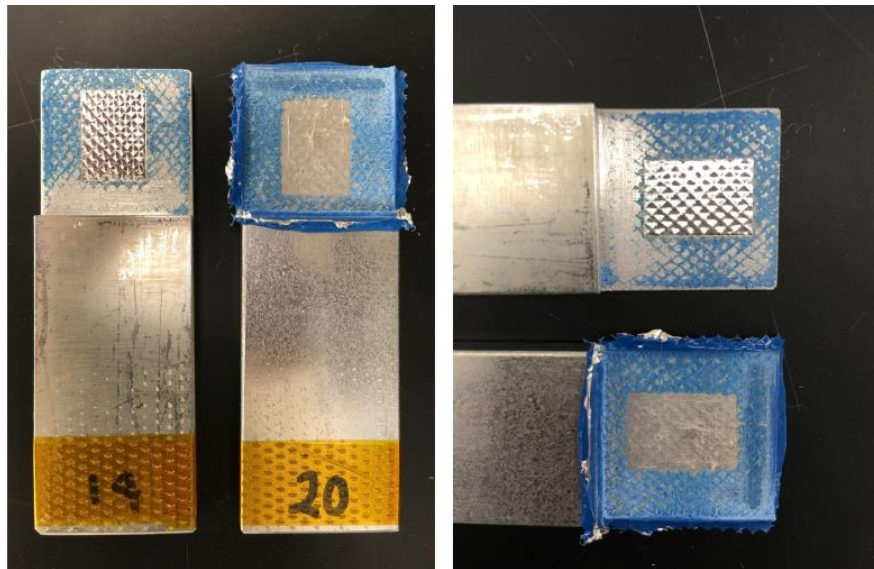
S13-20-14-R24-Fracture Surface
